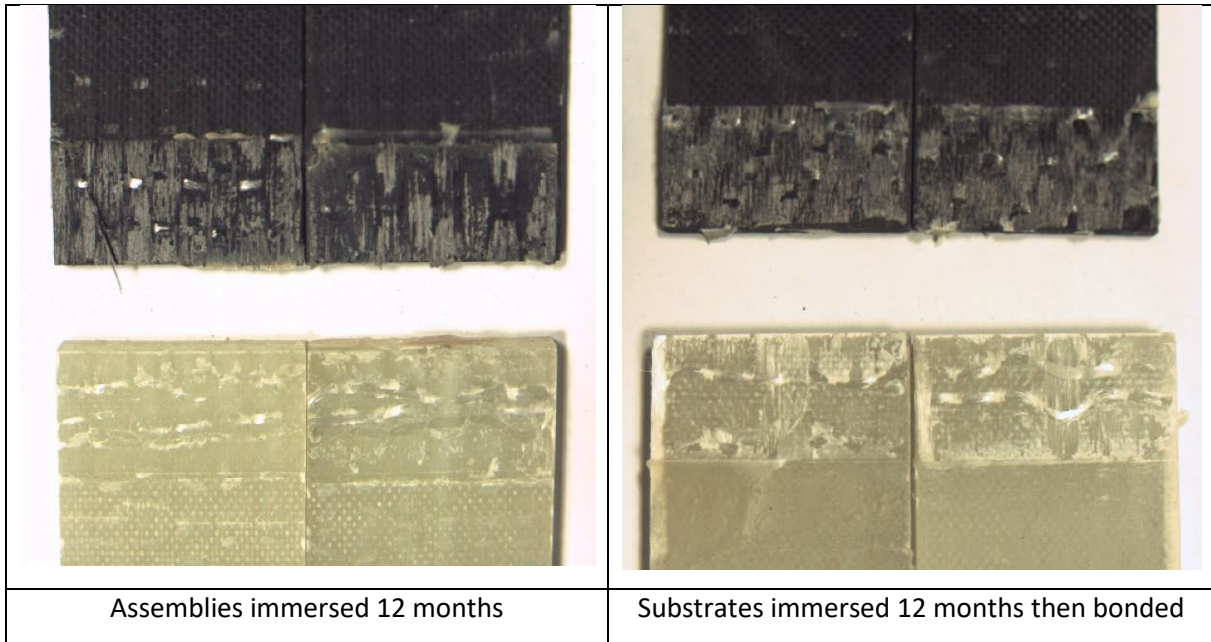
Examples of fracture surfaces for carbon (upper) and glass (lower) composite assemblies
